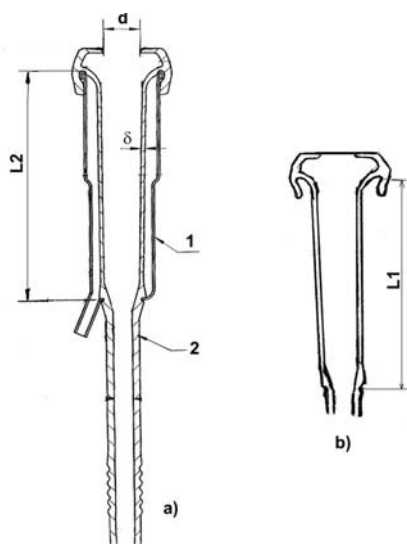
Teatcup construction and liner dimensions; a) assembled teatcup: 1-shell; 2-liner; d-liner mouthpiece diameter; δ -liner thickness; b) unmounted liner Placing a 2 mm thick washer at the top of the shell resulted in a liner stretch of 6.9%
